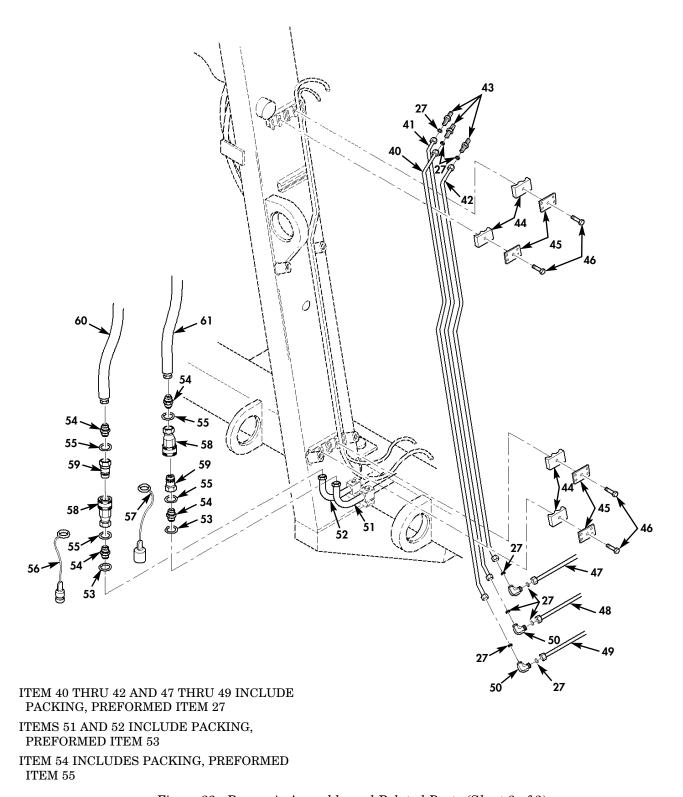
Reservoir Assembly and Related Parts (Sheet 3 of 3).
